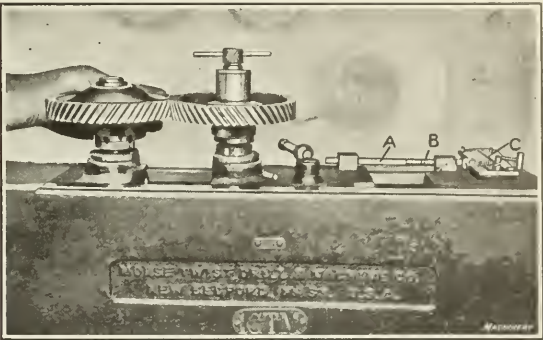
Standard Fixture for testing Concentricity and Center Distances of Spur Gears
